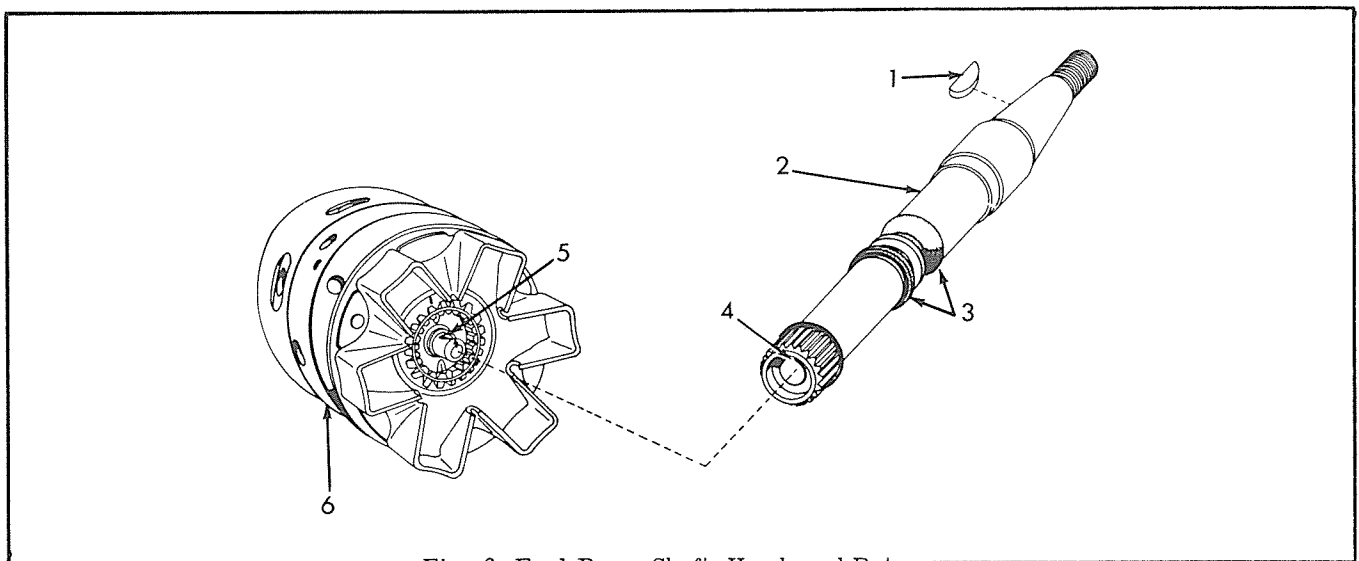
Fuel Pump Shaft, Head, and Rotor
